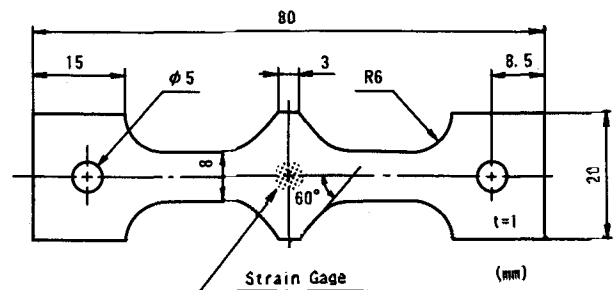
Shape and dimensions of specimen for generating biaxial stress
